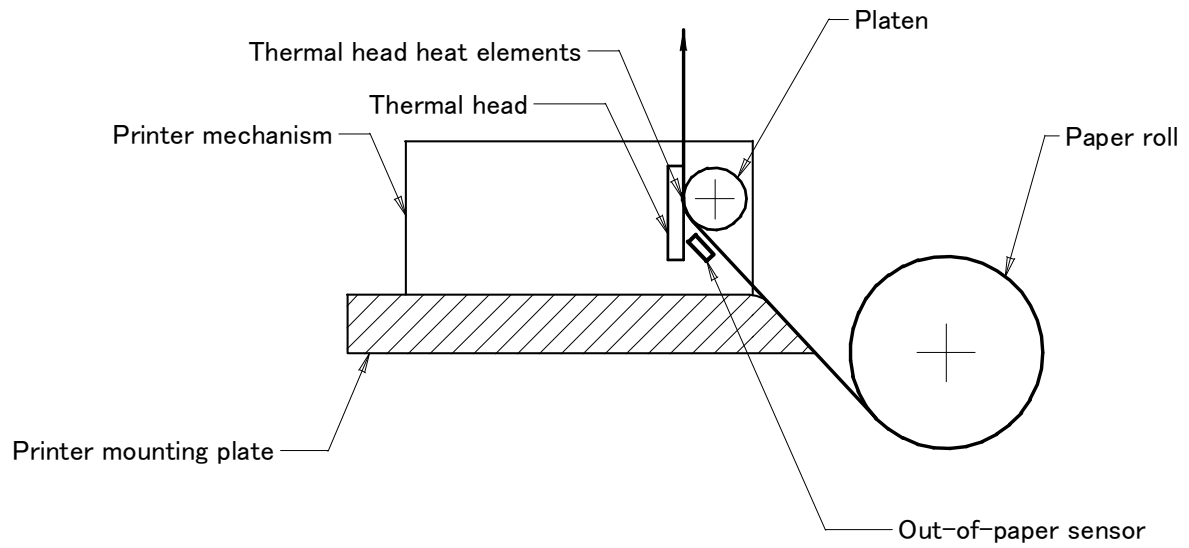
Layout of the Printer Mechanism and the Thermal Paper
